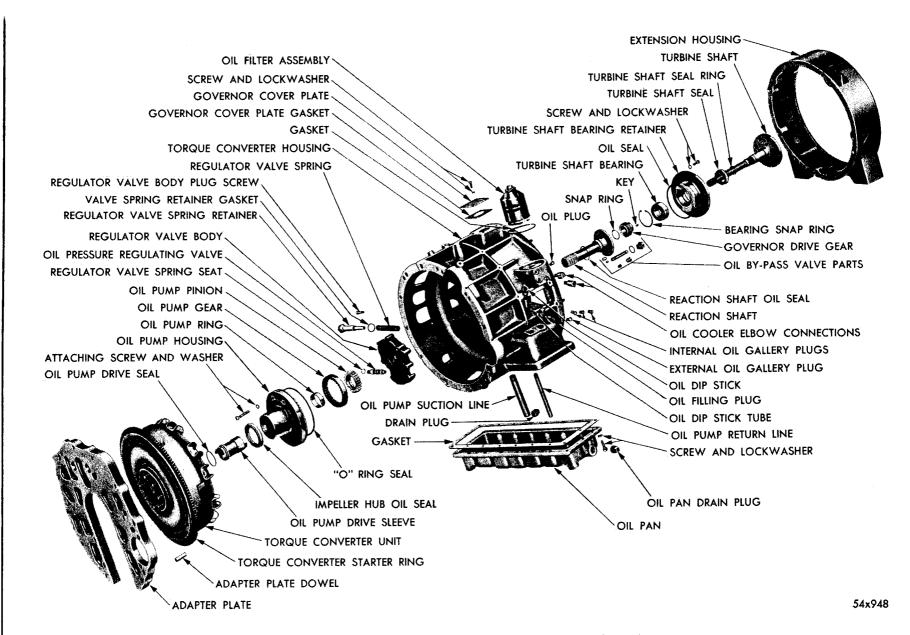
Torque Converter Housing Assembly (Exploded View)
